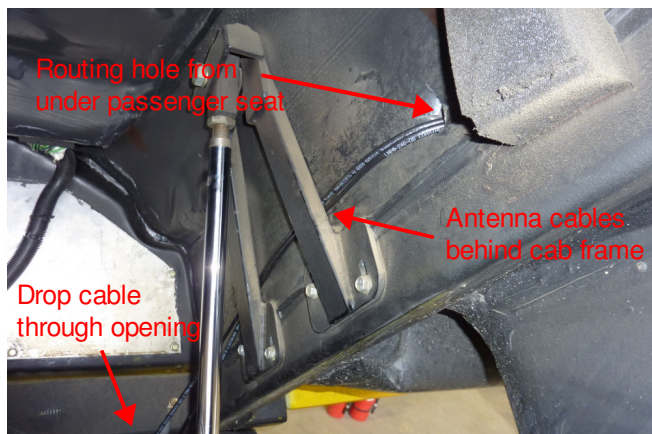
Antenna cable routed beneath cab frame under elevated cab
